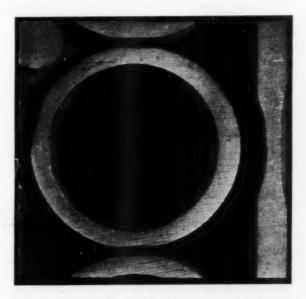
Cross-section of cylinder block at location of removal of ring specimen.
